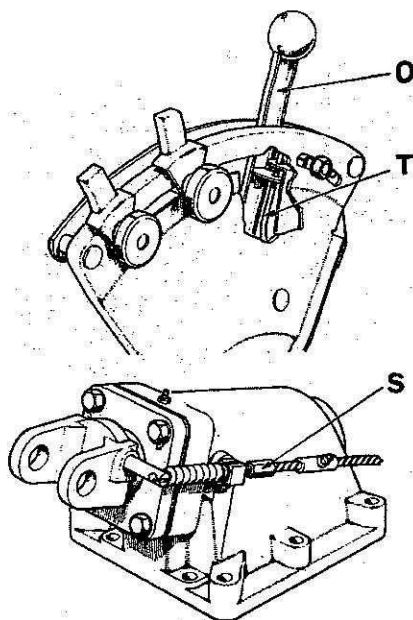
Adjusting points for top link sensing unit flexible cable; refer to text for procedure.
